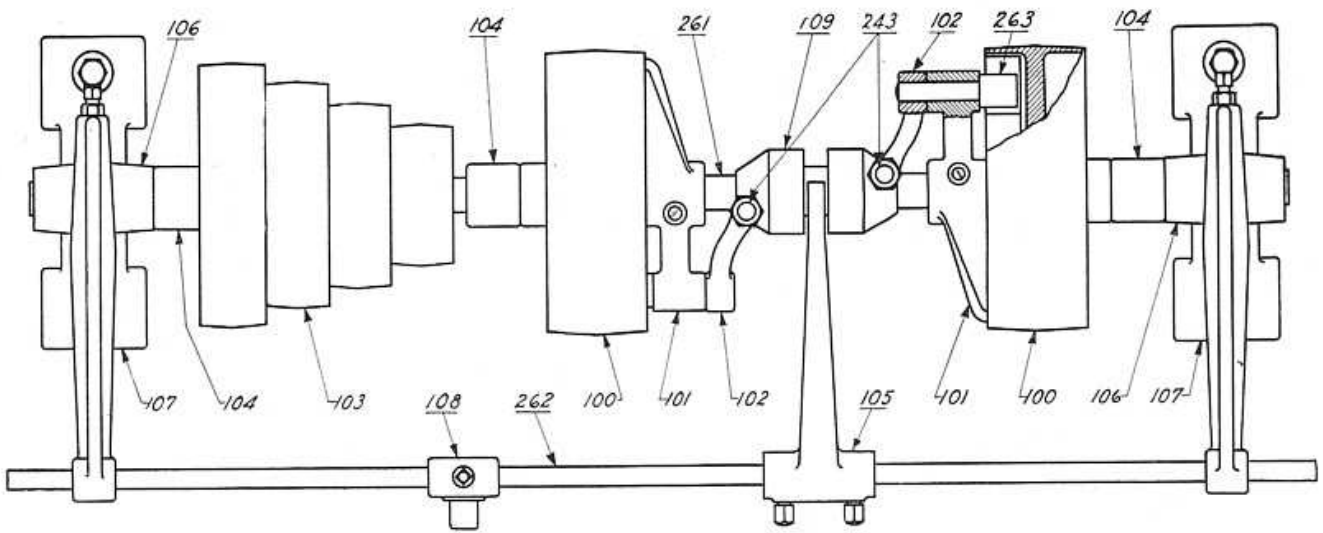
Illustration Showing Parts of Double Friction Countershaft.
